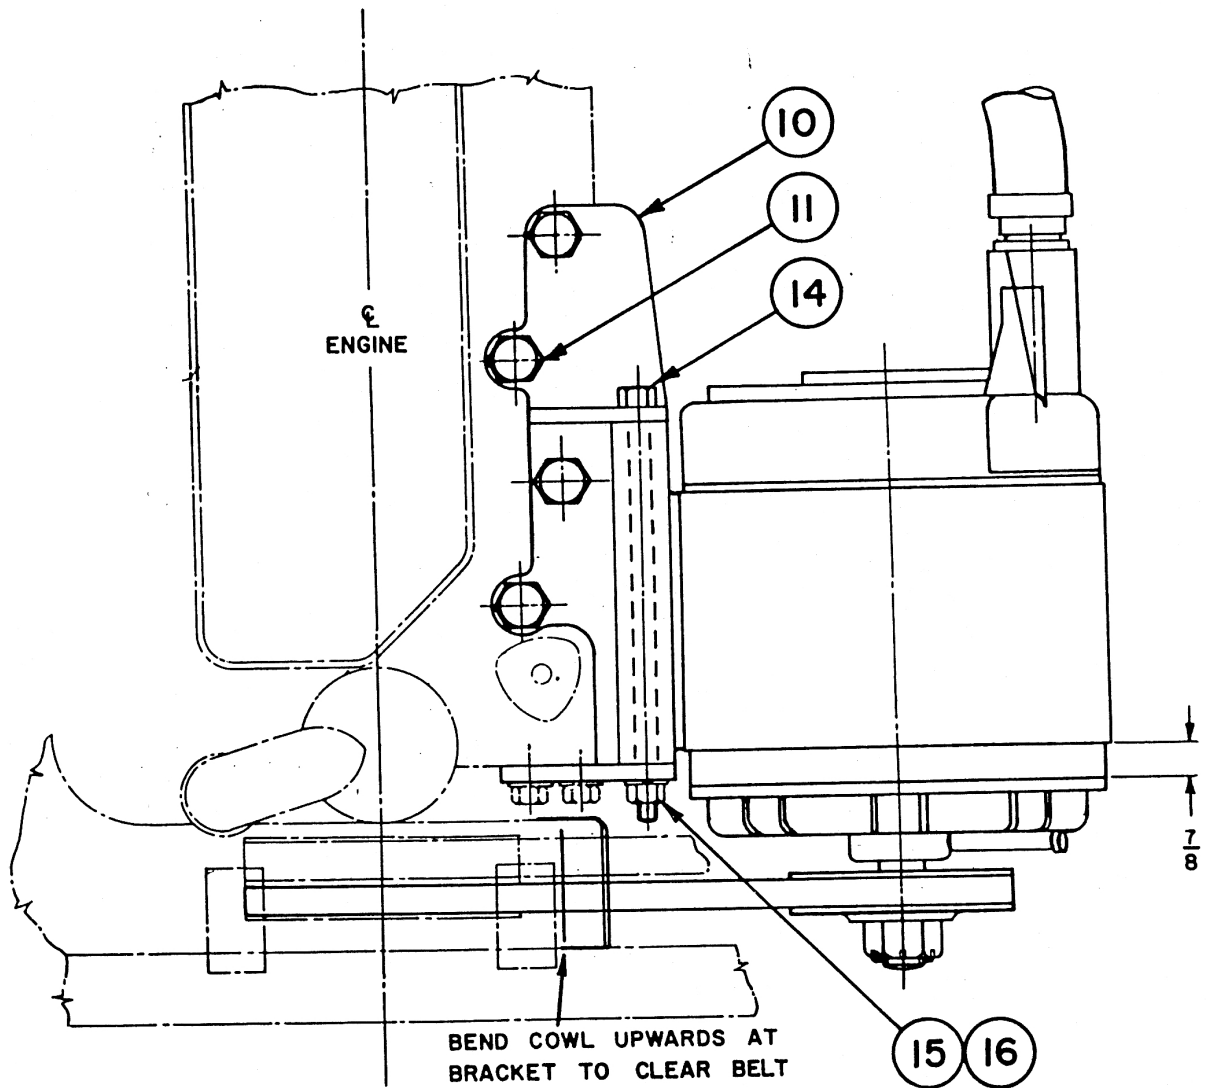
FITTING OF ALTERNATOR TO ENGINE - PLAN
